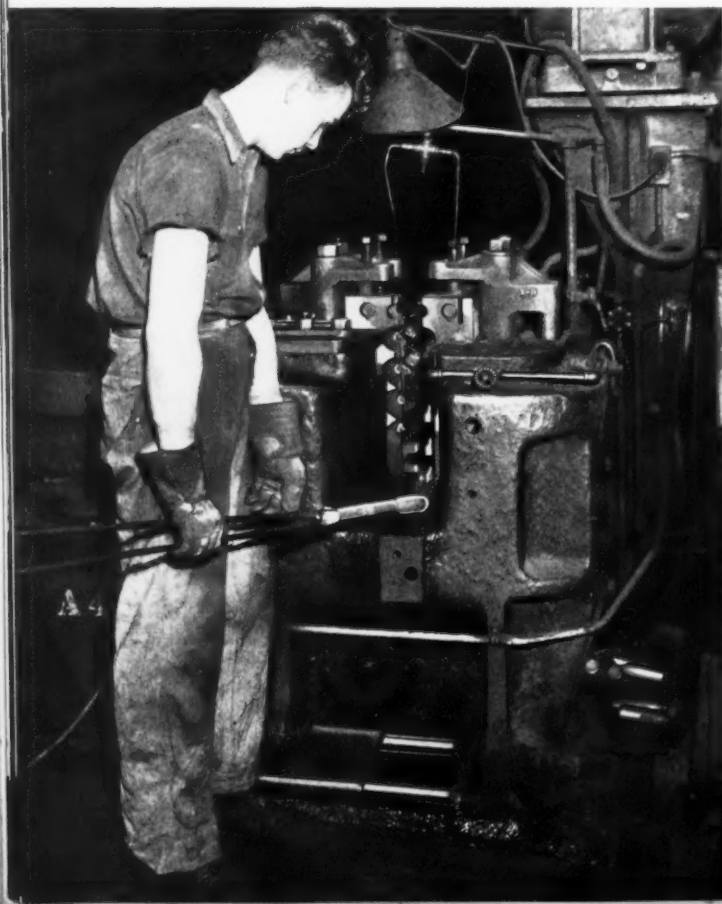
One of the Forging Machines that Produce the Armor-piercing Shot Bodies from Round Bar Stock
